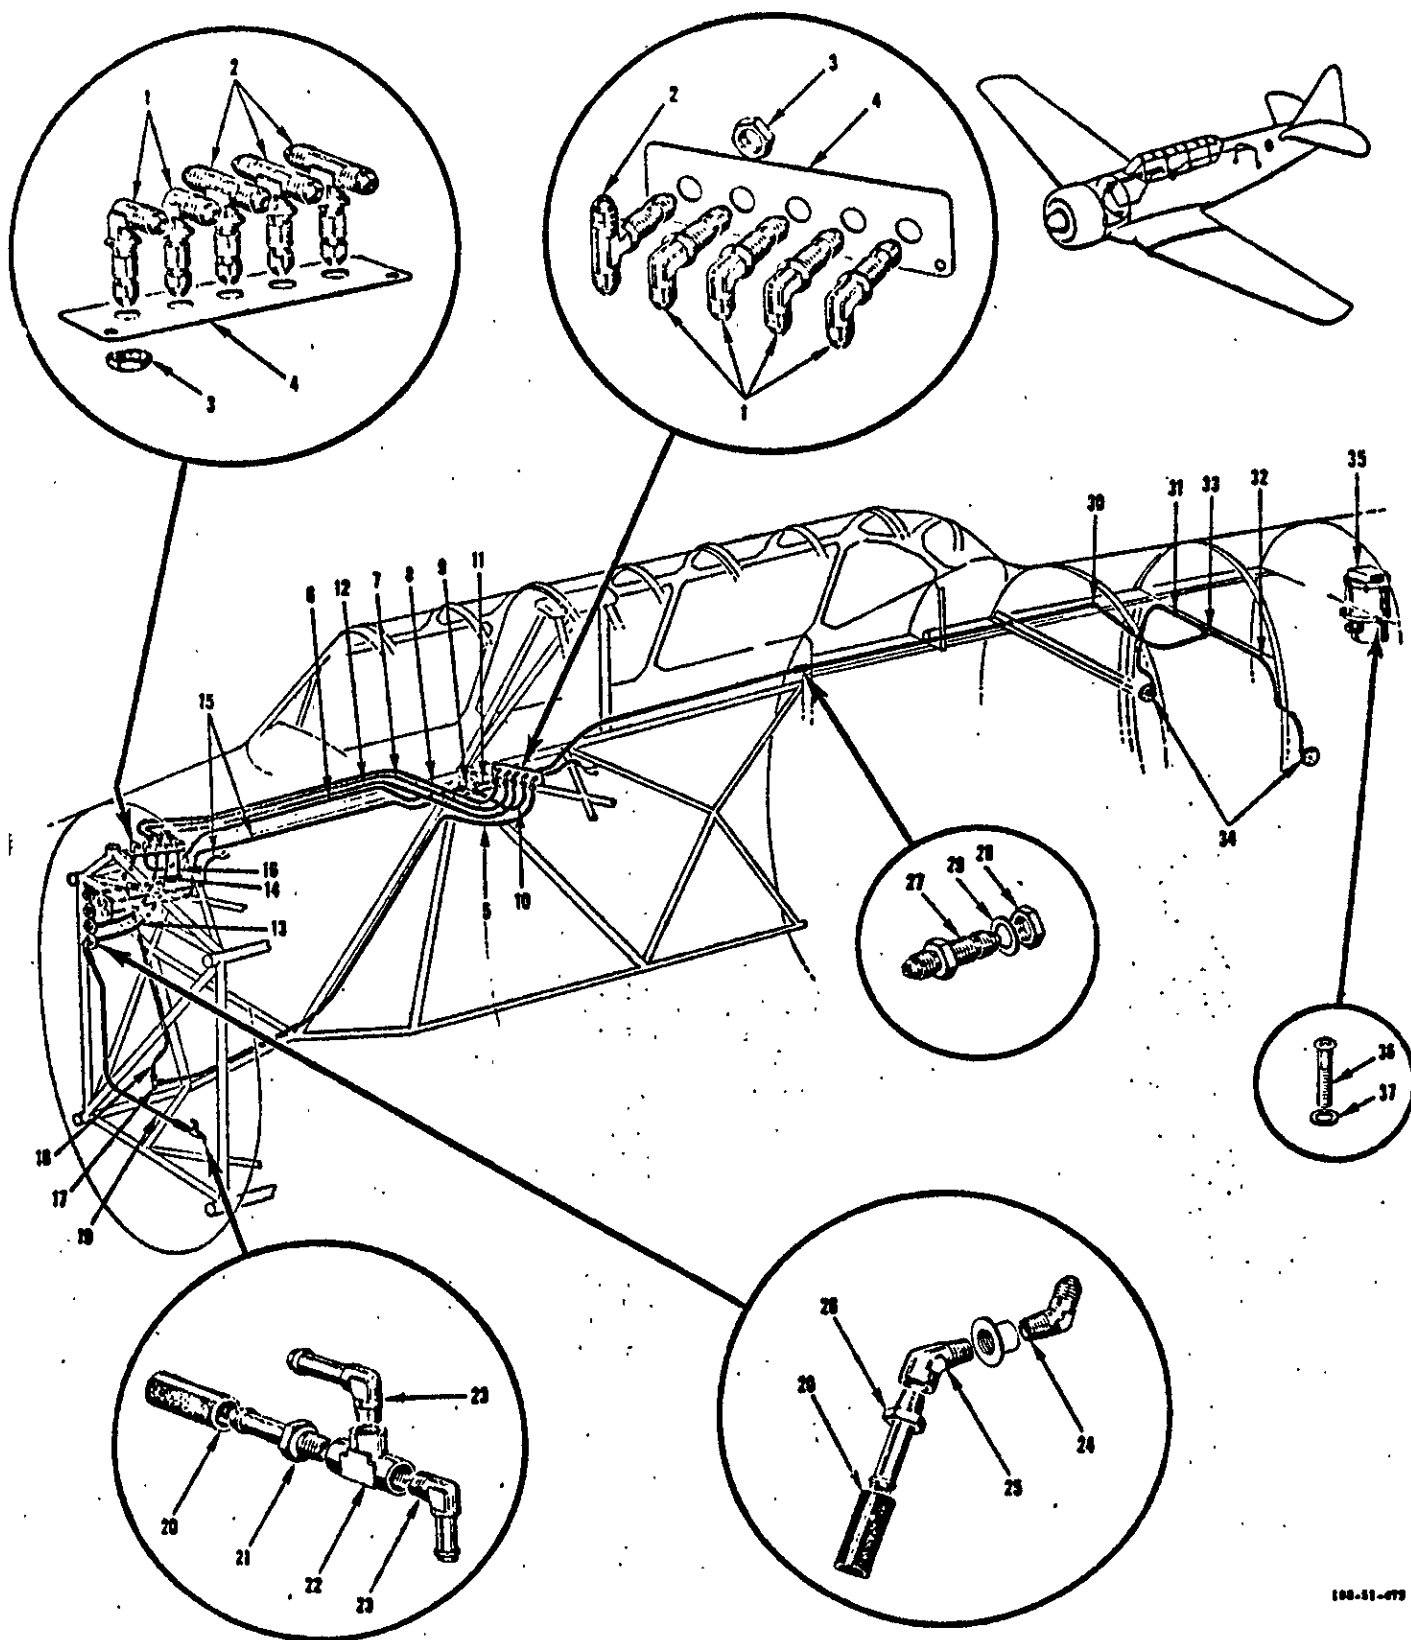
A - RIGHT SIDE FRONT AND REAR FUSELAGE INSTRUMENT EQUIPMENT
